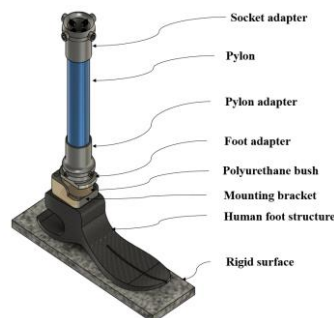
Assembly view of the multi-axial foot-ankle mechanism
